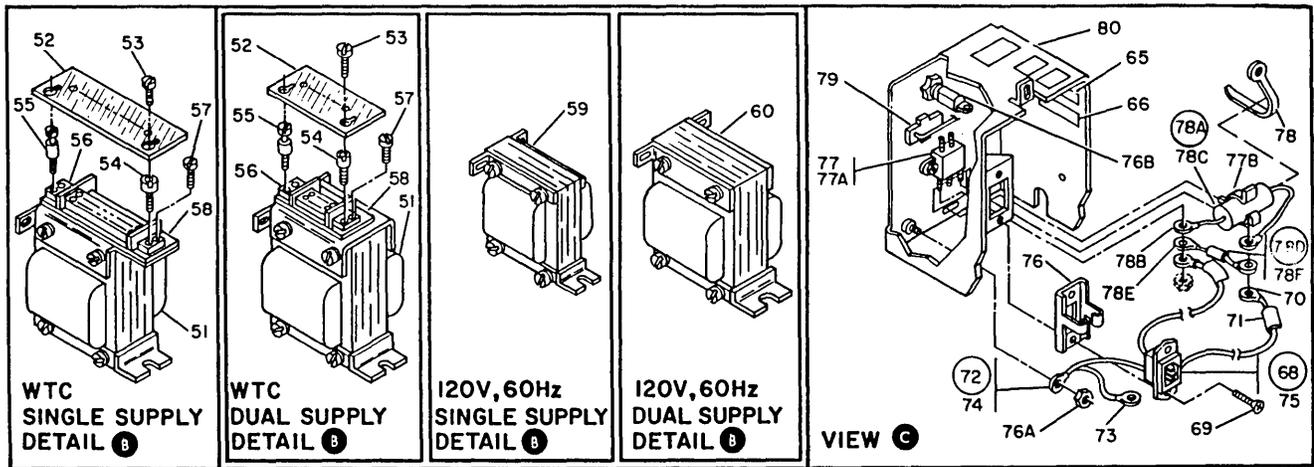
FINAL ASSEMBLY 3274 (SHEET 2 OF 2, INDEX NOS. 50-109)
